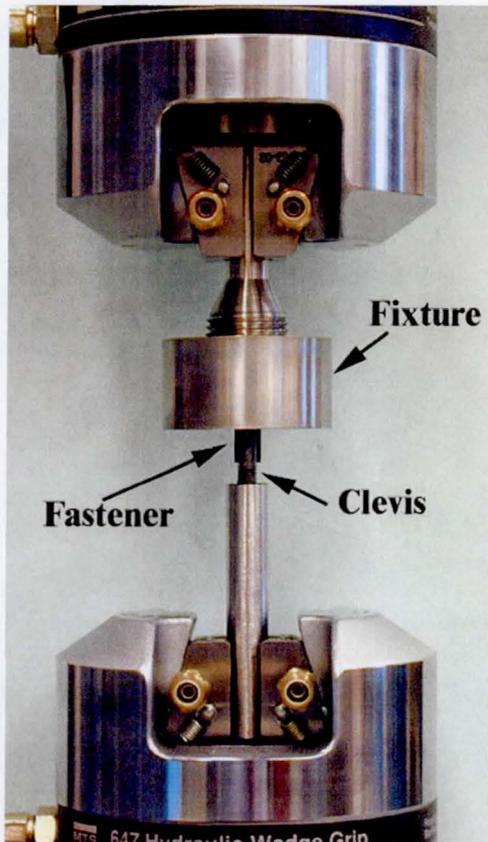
Configuration for tensile testing of SiC/SiC fasteners.
